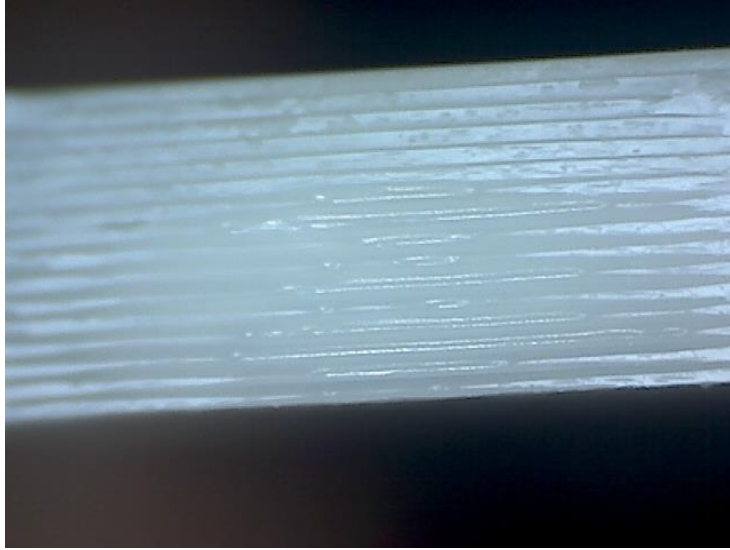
Fracture surface of a 90° toolpath orientation discontinuous build ABS tensile specimen.
